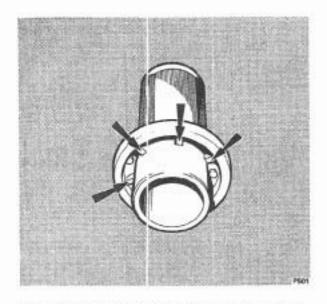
UNDER CUTTING WEBBING OF SEAL INSTALLATION TOOL RH 7953 (J-21359)
